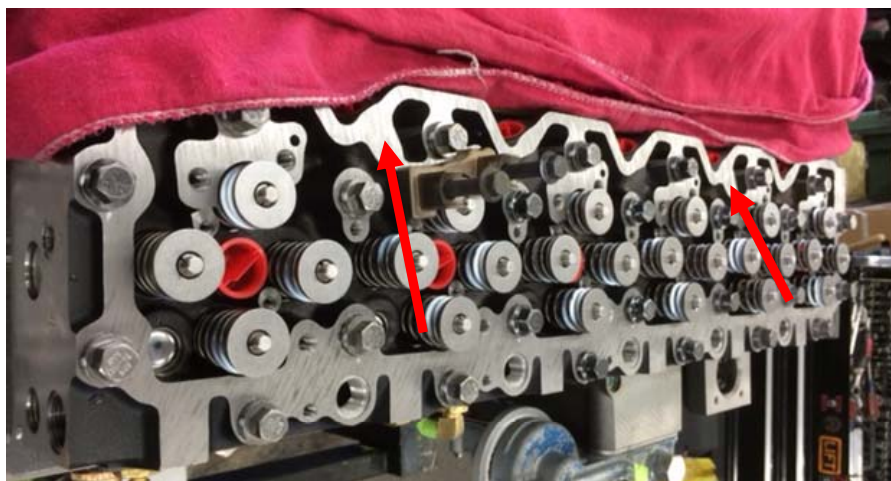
cylinder head detail, red arrows point to 2 and 5 cylinder oil channels
